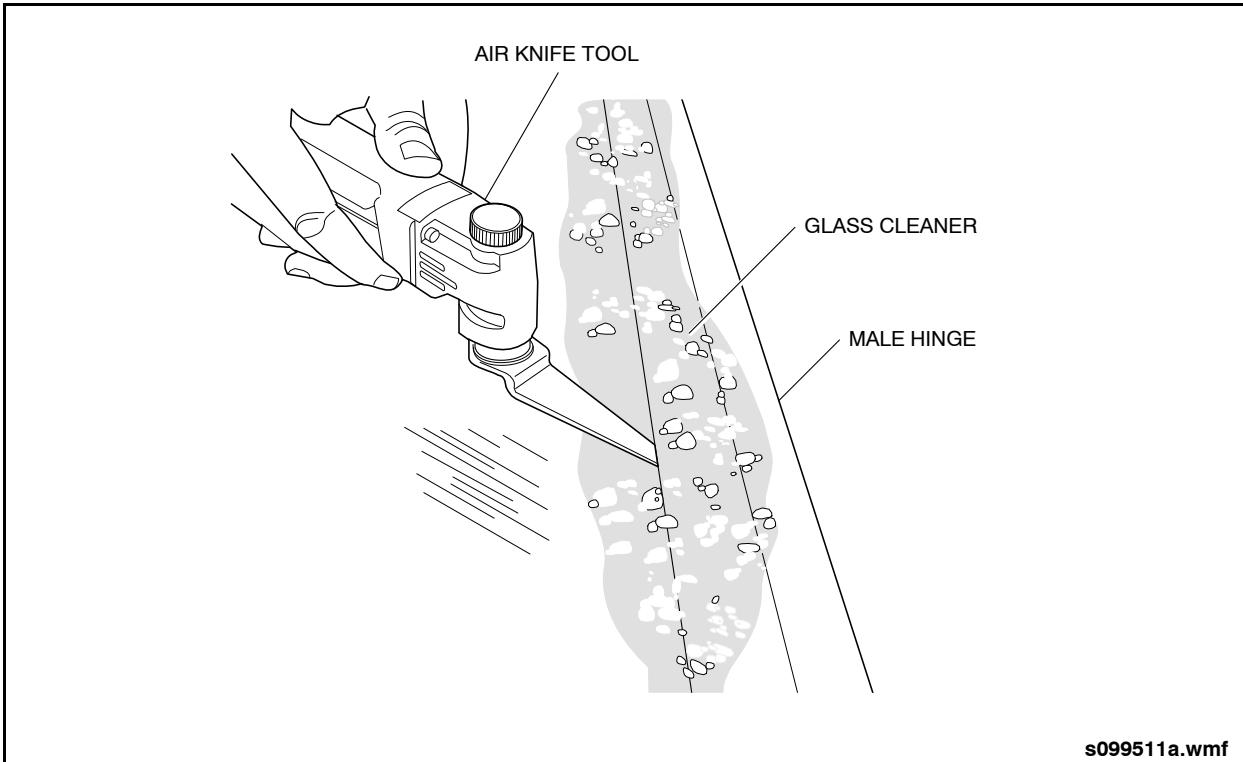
Cutting of Bond Between Male Hinge & Glass
